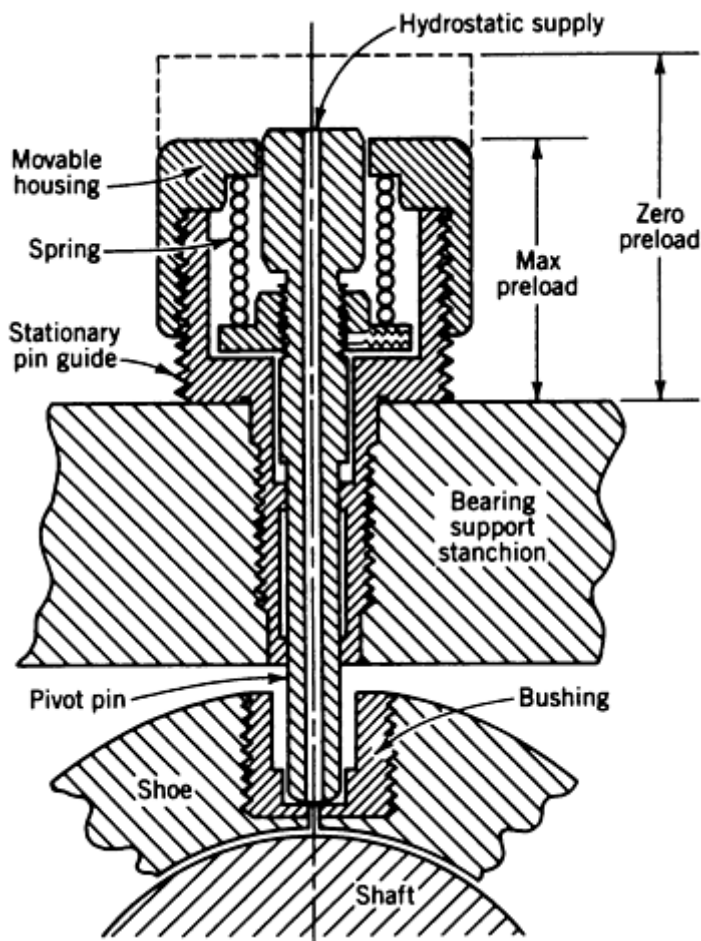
Cross-sectional view of a spring-mounted pivot assembly. Source: Ref 21
